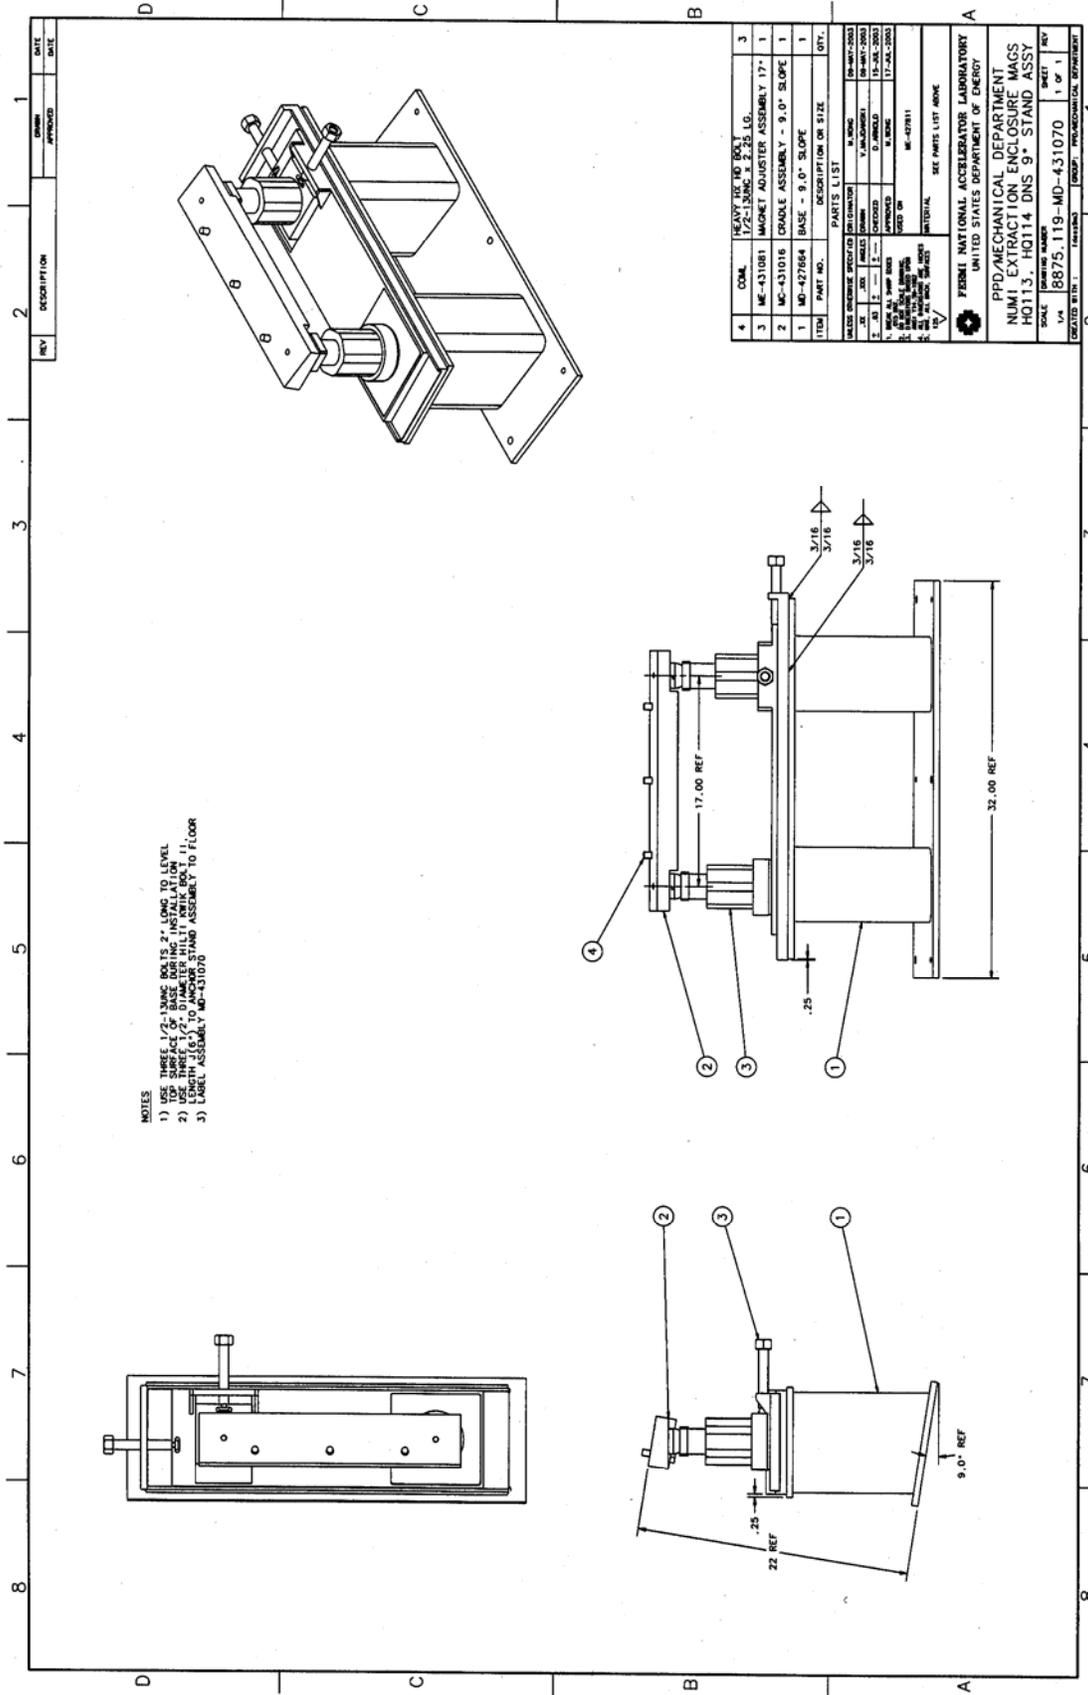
Drawing of Typical Quad Magnet Stand (Drawing 8875.119-MD-431070)
